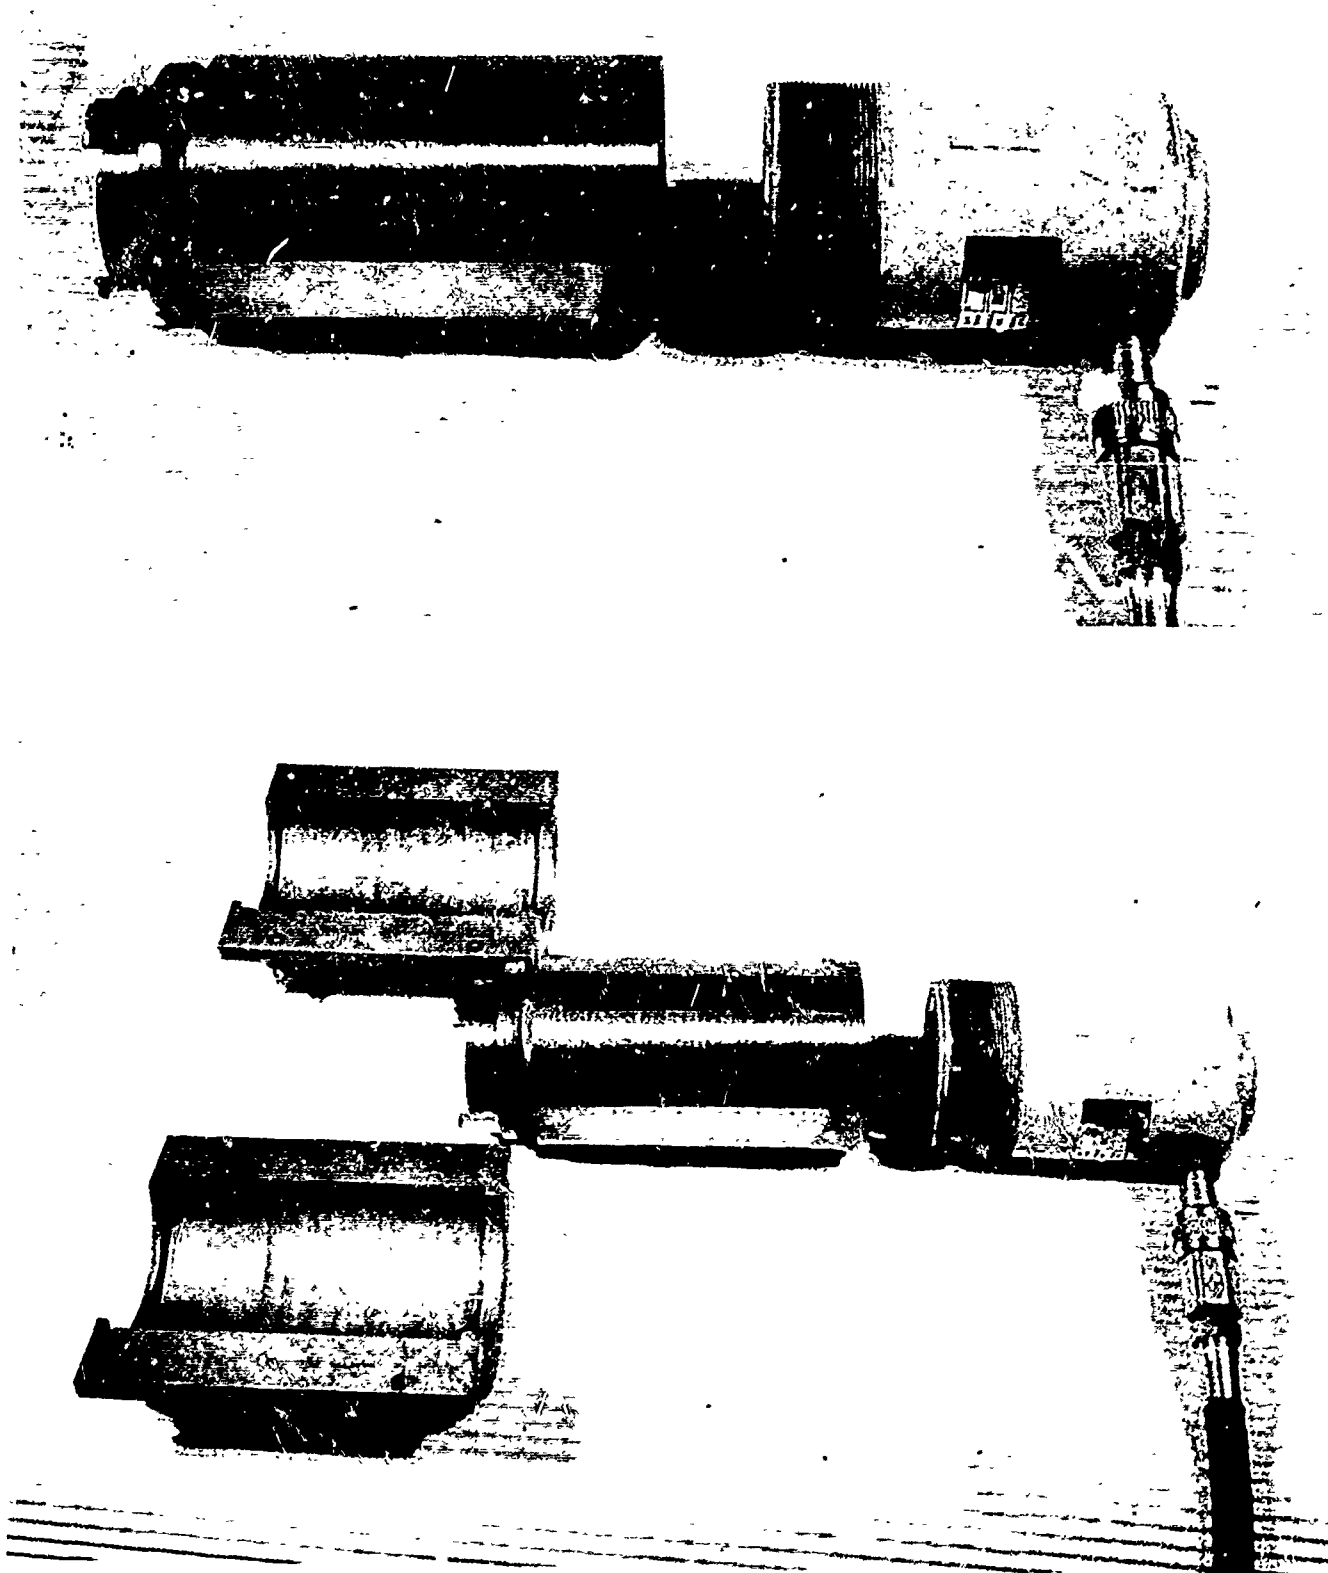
BALL BEARING INNER RACE PULLER (TOP); ROLLER BEARING INNER RACE PULLER (BOTTOM)
